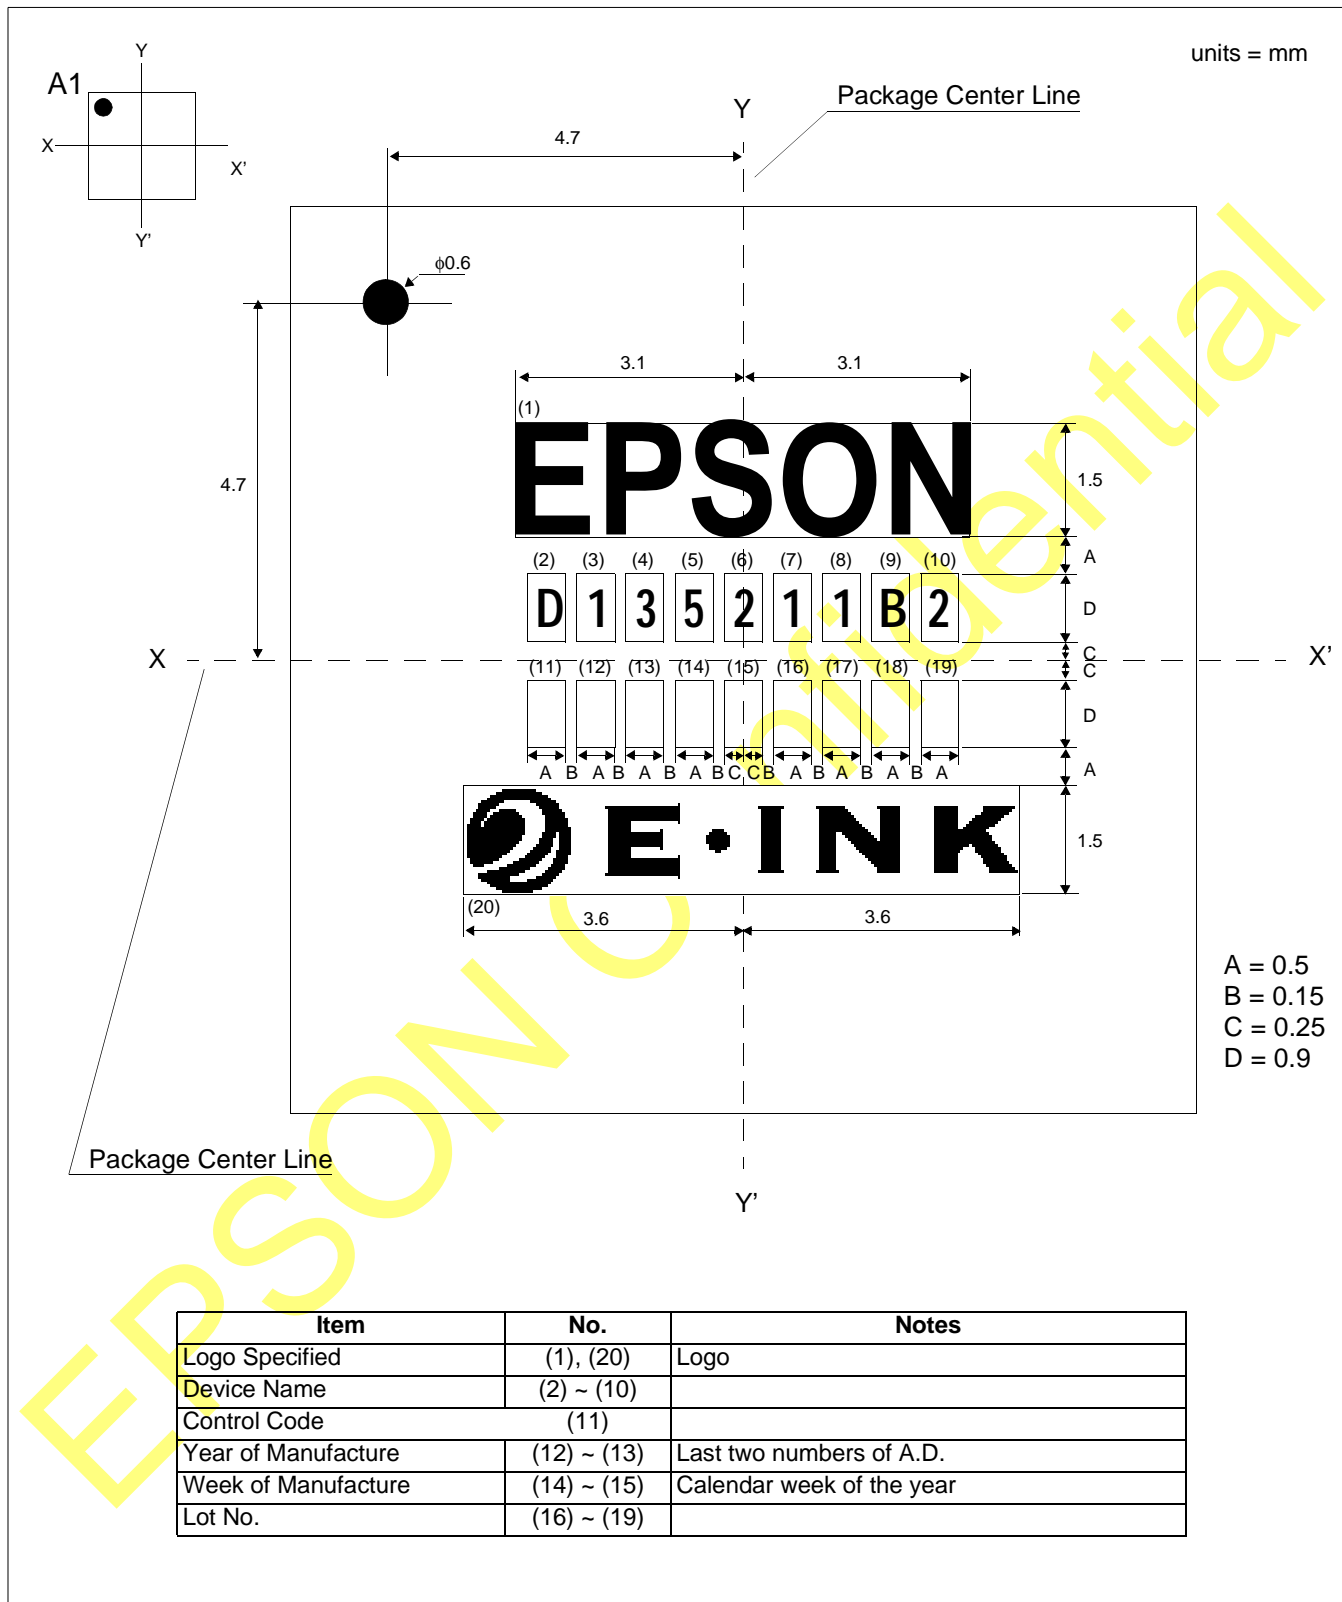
SID13521 PFBGA12UX 180-pin Package Marking
